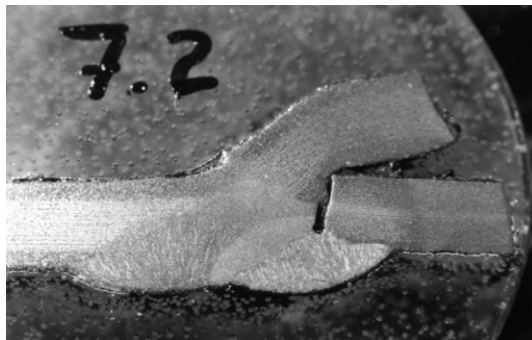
First weld pass laid outside the groove. The joint is fulfilled only by the second pass. Plate thickness: 2.8 mm.
